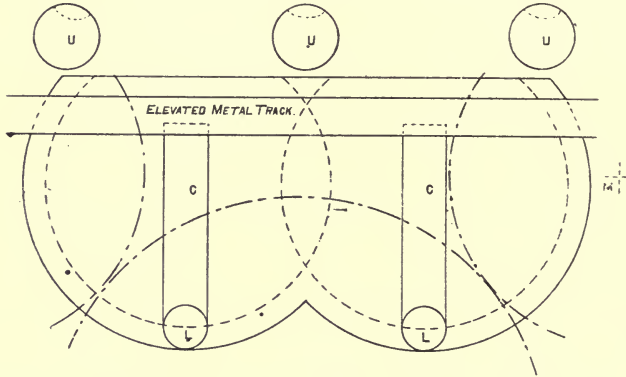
Plan of Bessemer Plant with Two Casting Pits.
